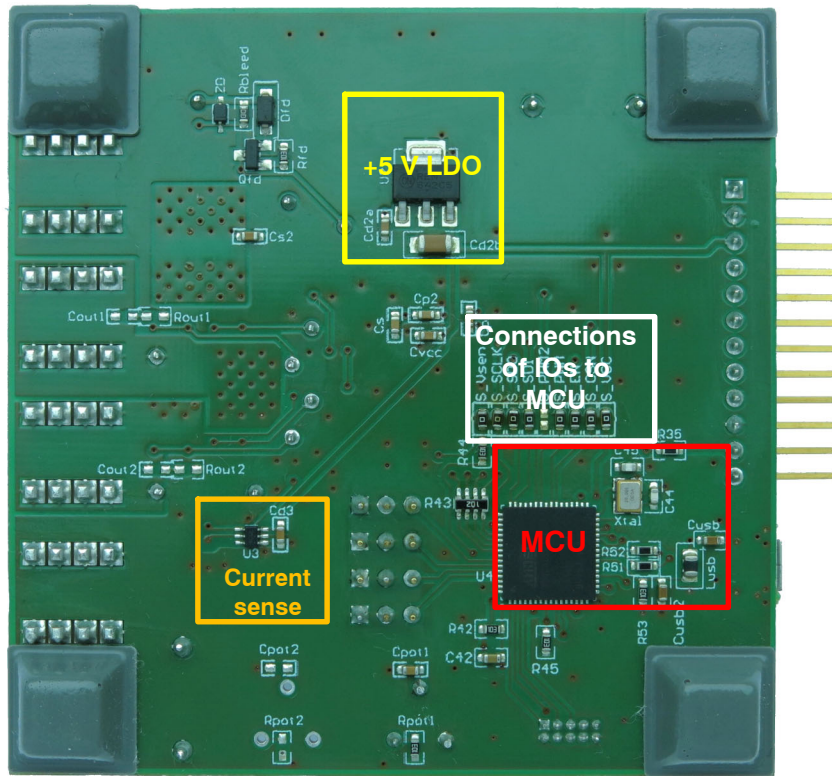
NCV7535 Evaluation Board Picture, bottom side
